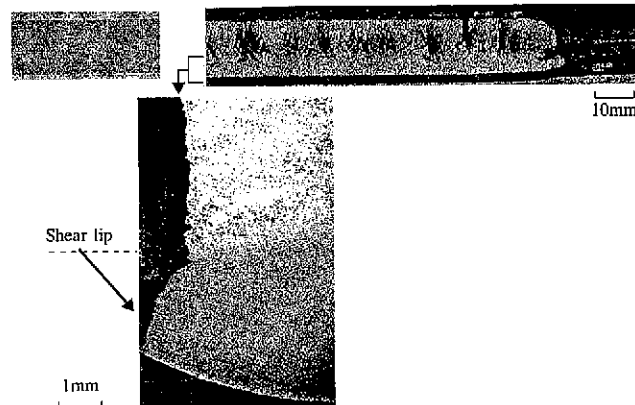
(b) Fracture and cross section of 18-mm thick HIAREST plate
